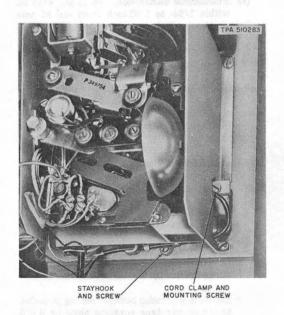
Location of Armored Cord Mounting Hardware in 235- and 1235-Type Coin Collector
